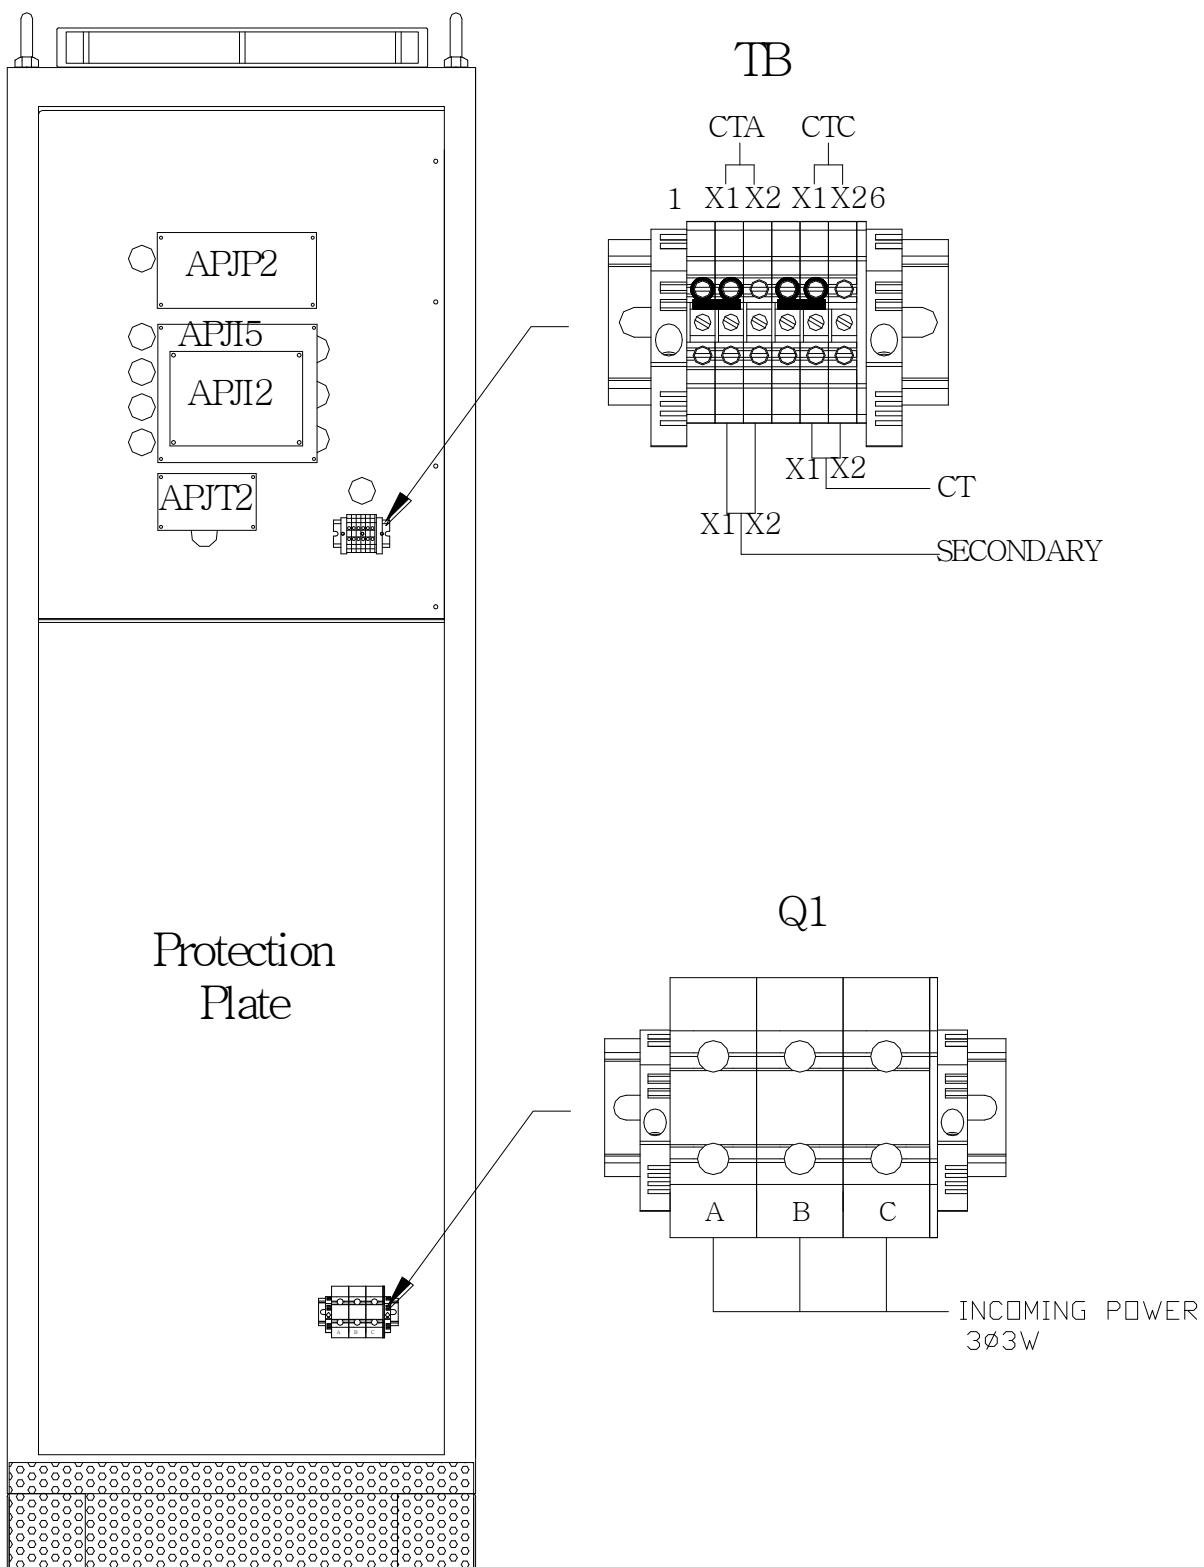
AF-0025 & AF-0050 Wiring Position
